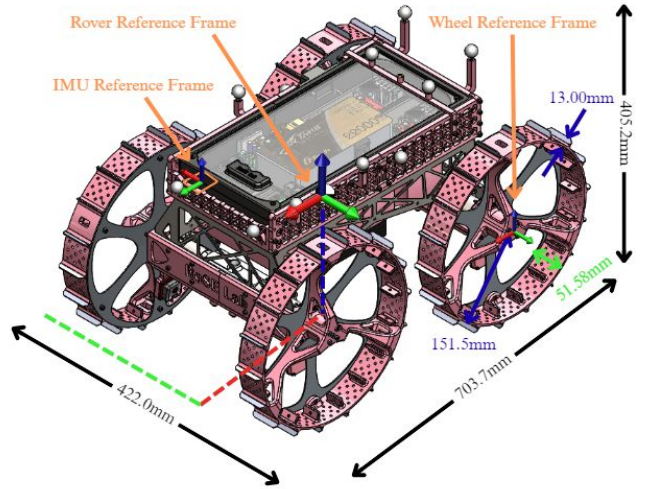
RoSEy CubeRover–6U dimensions and reference frames for the rover frame, IMU frame, and wheel frame defined in Section IV-C1. Relevant dimensions, such as rover length L × width W × height H , the location of the center of mass, wheel radius r , wheel width b , and grouser height h are shown. Axes in all reference frames are color-coded consistently: $\hat{x}$ (red), $\hat{y}$ (green), and $\hat{z}$ (blue).
